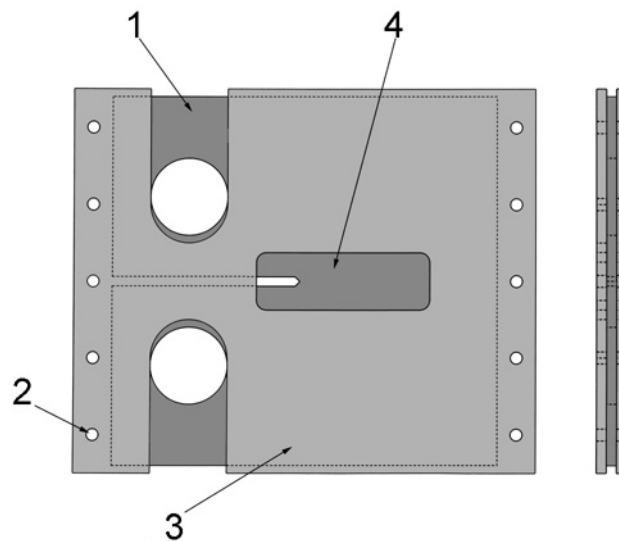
Typical design of compact specimen loading clevis with oversized circular loading pin hole
